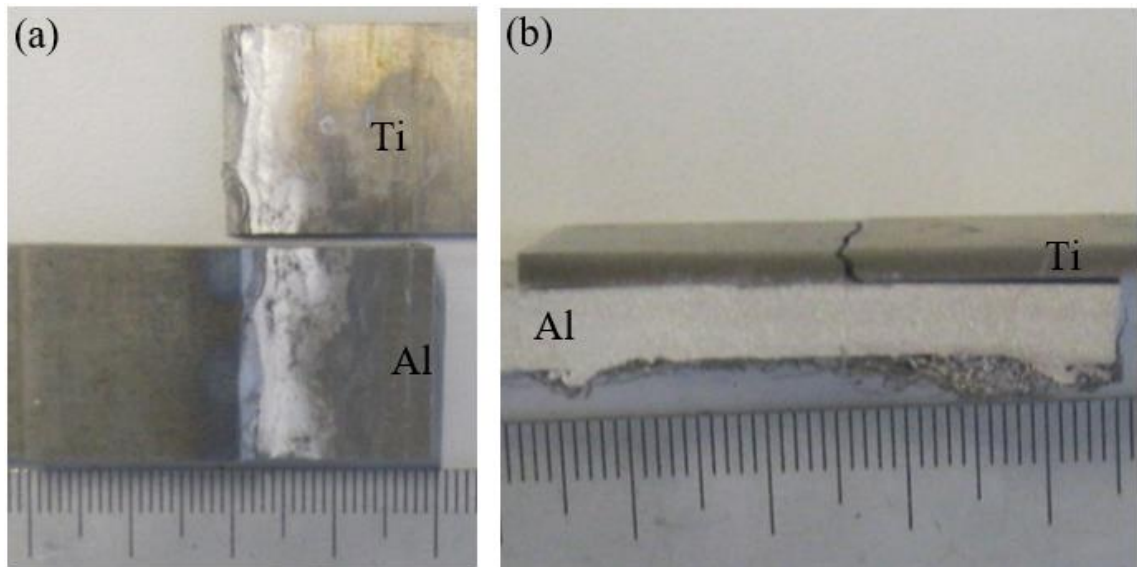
Actual photograph of a FSLW fatigue tested sample failed with fracture path 3: (a) top view and labelled, (b) side view with fractured TiAl64V plate on top with a centre fracture.
